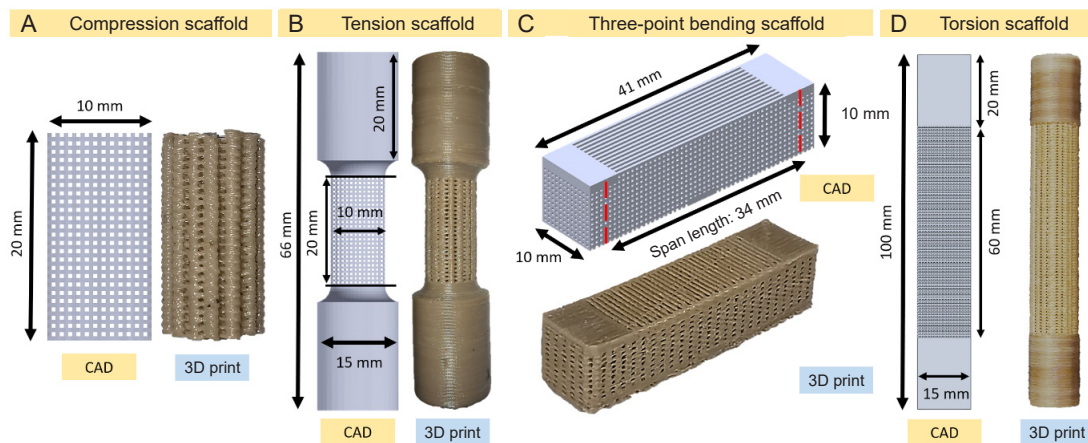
(A–D) Schematic CAD design and AM manufactured test specimens for compression (A), tension (B), three-point bending test (C), and torsion (D). 3D: three-dimensional; AM: additive manufacturing; CAD: computer-aided design.
